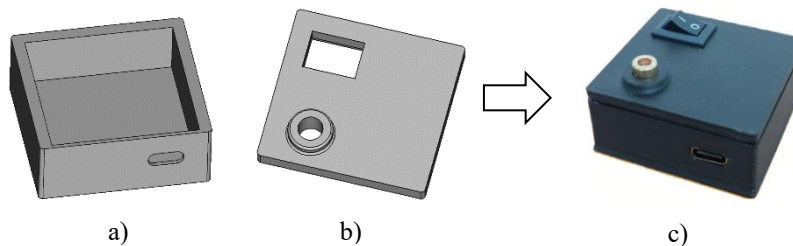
3D model of the electrical components housing (a); 3D model of the housing cover (b); Laser device (c).
